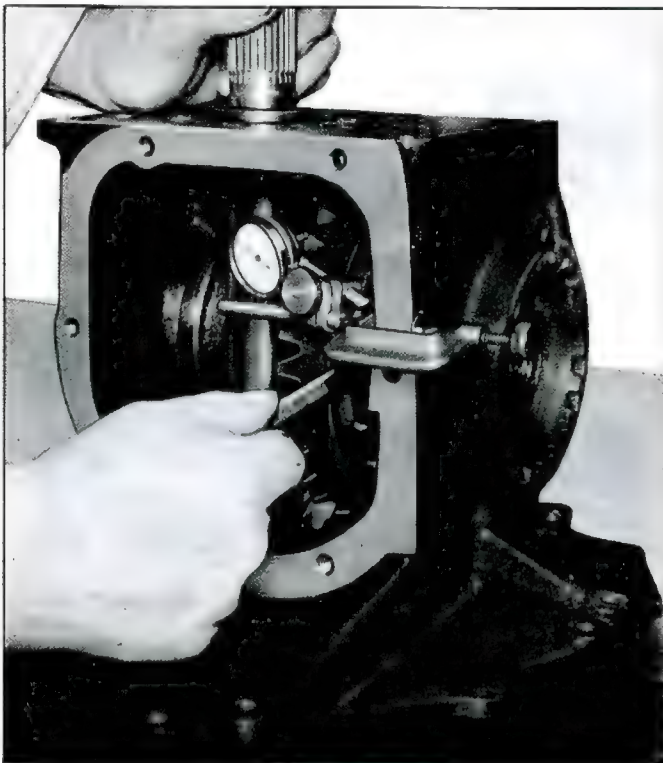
Measuring Ring Gear-to-Pinion Backlash with J-8001
